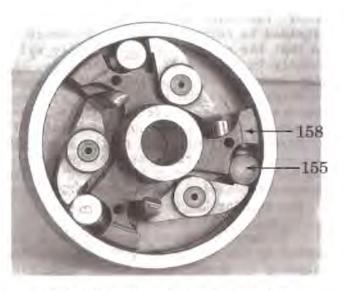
Rapid Feed Clutch Disc Showing Clutch Rollers, Springs, Levers and Carrier Assembled
